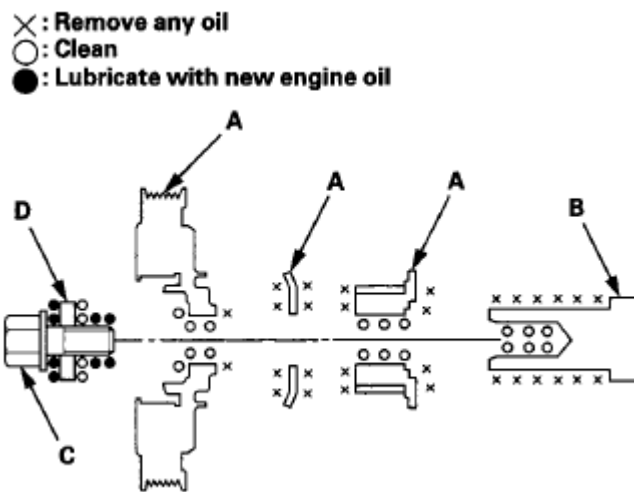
Identifying Pulleys, Crankshaft, Bolt And Washer
